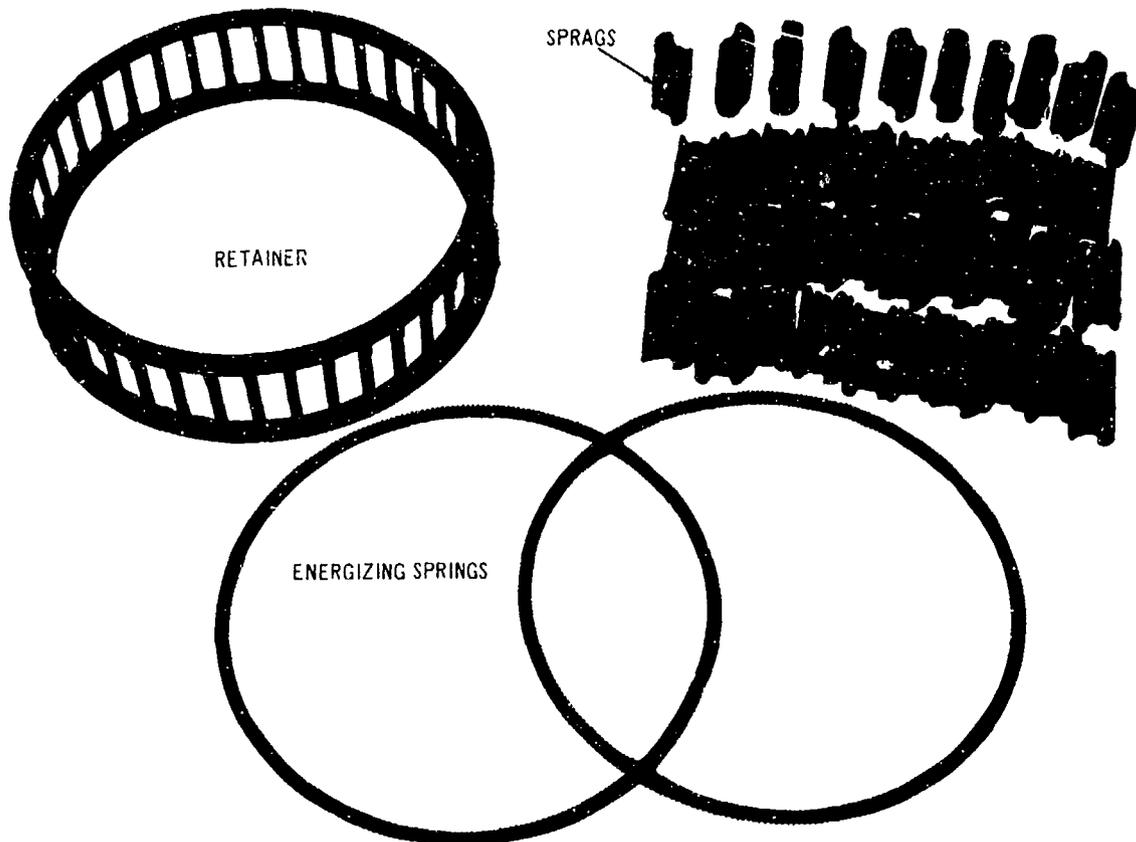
Sprags, Retainer, and Energizing Springs Employed in UH-2C Overrunning Clutch Assembly
